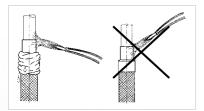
correct (left) and incorrect brazing (right) on a hose assembly
